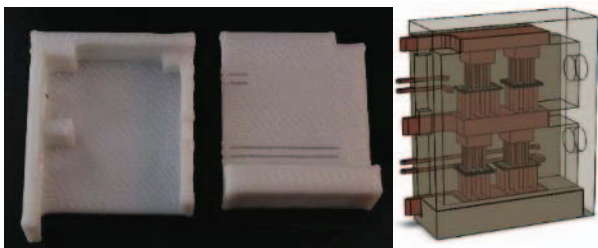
(a) Image of the two sides of the additively manufactured housing and (b) location of the stacked half-bridge assembly in the housing.
